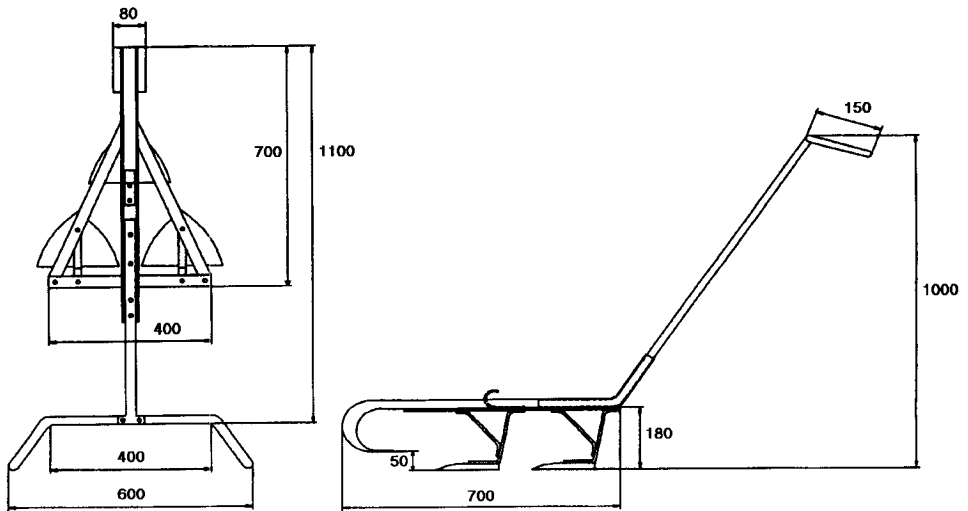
Improved *Hata* (*houe à traction asine*). All dimensions in millimetres
